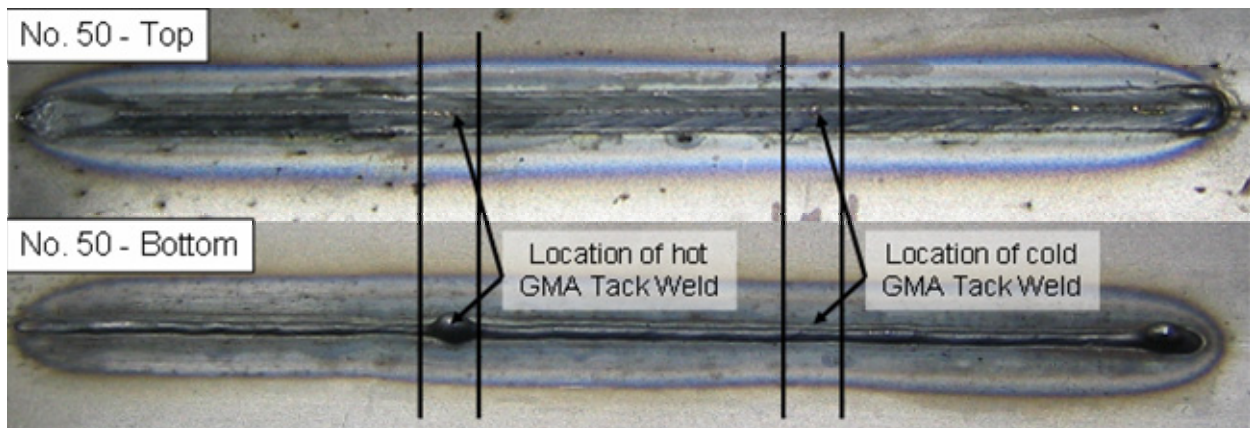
Blow-through resulting from hybrid welding over a hot GMAW tack welds.
